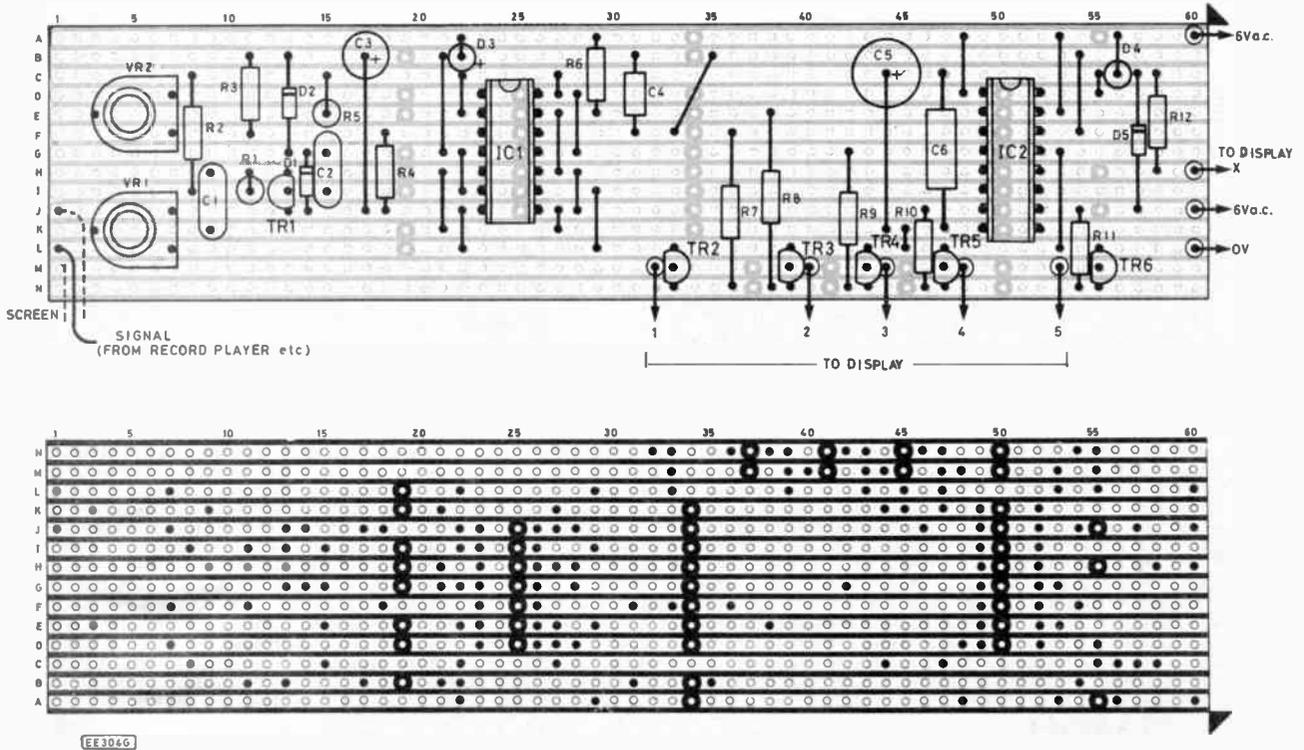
Component layout, underside showing breaks (44 off) in the copper strips and interwiring details. Use screened cable for the input signal lead.
